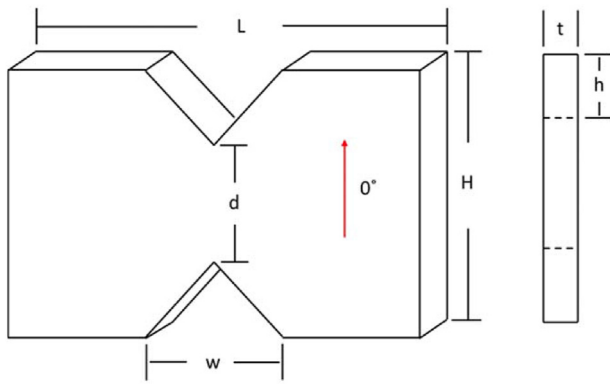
Dimensions of VRS specimen (all dimensions are in mm).
